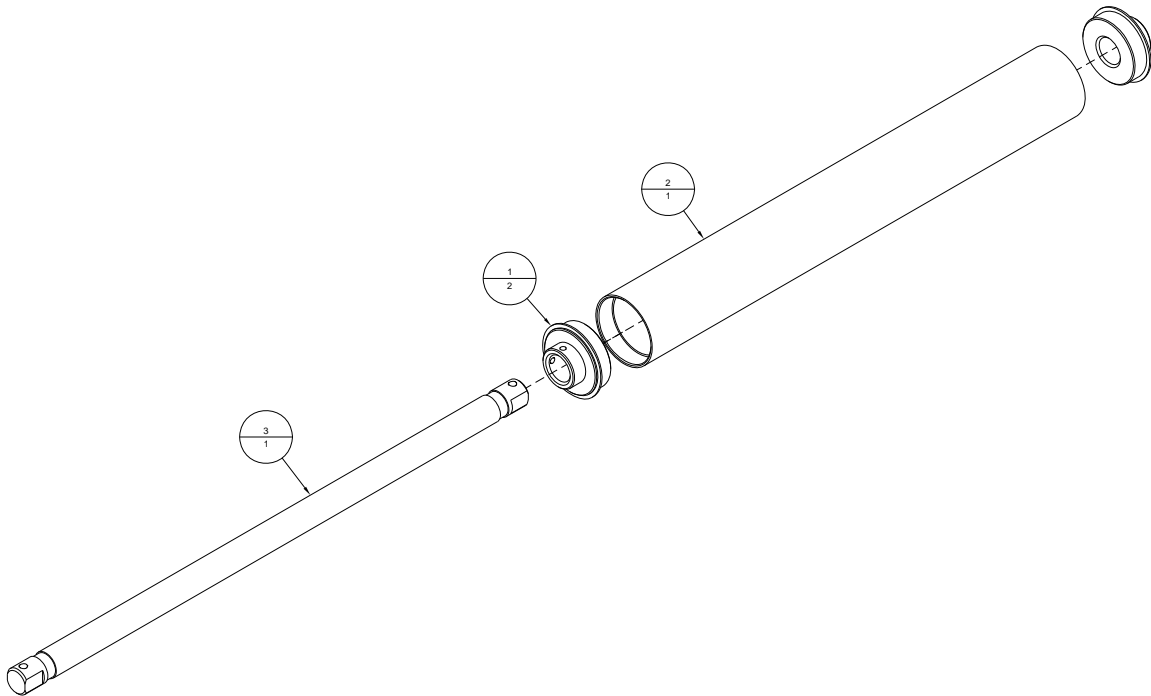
9105388A - Idler Roller Assembly, Conveyor
